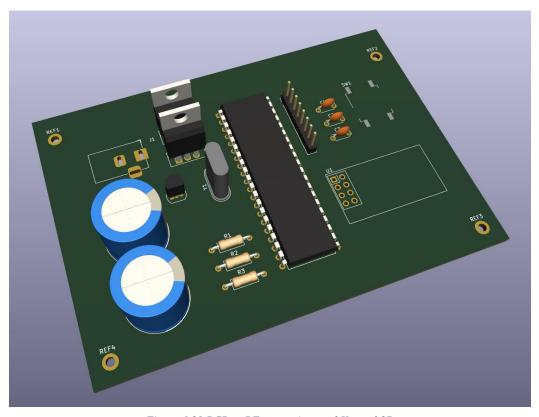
PCB - nRF transceiver and Keypad 3D
